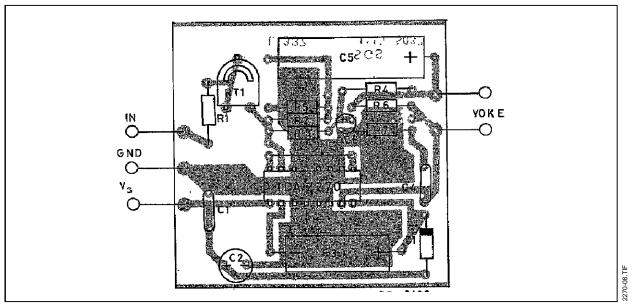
PC Board and Component Layout (1 : 1 scale)
